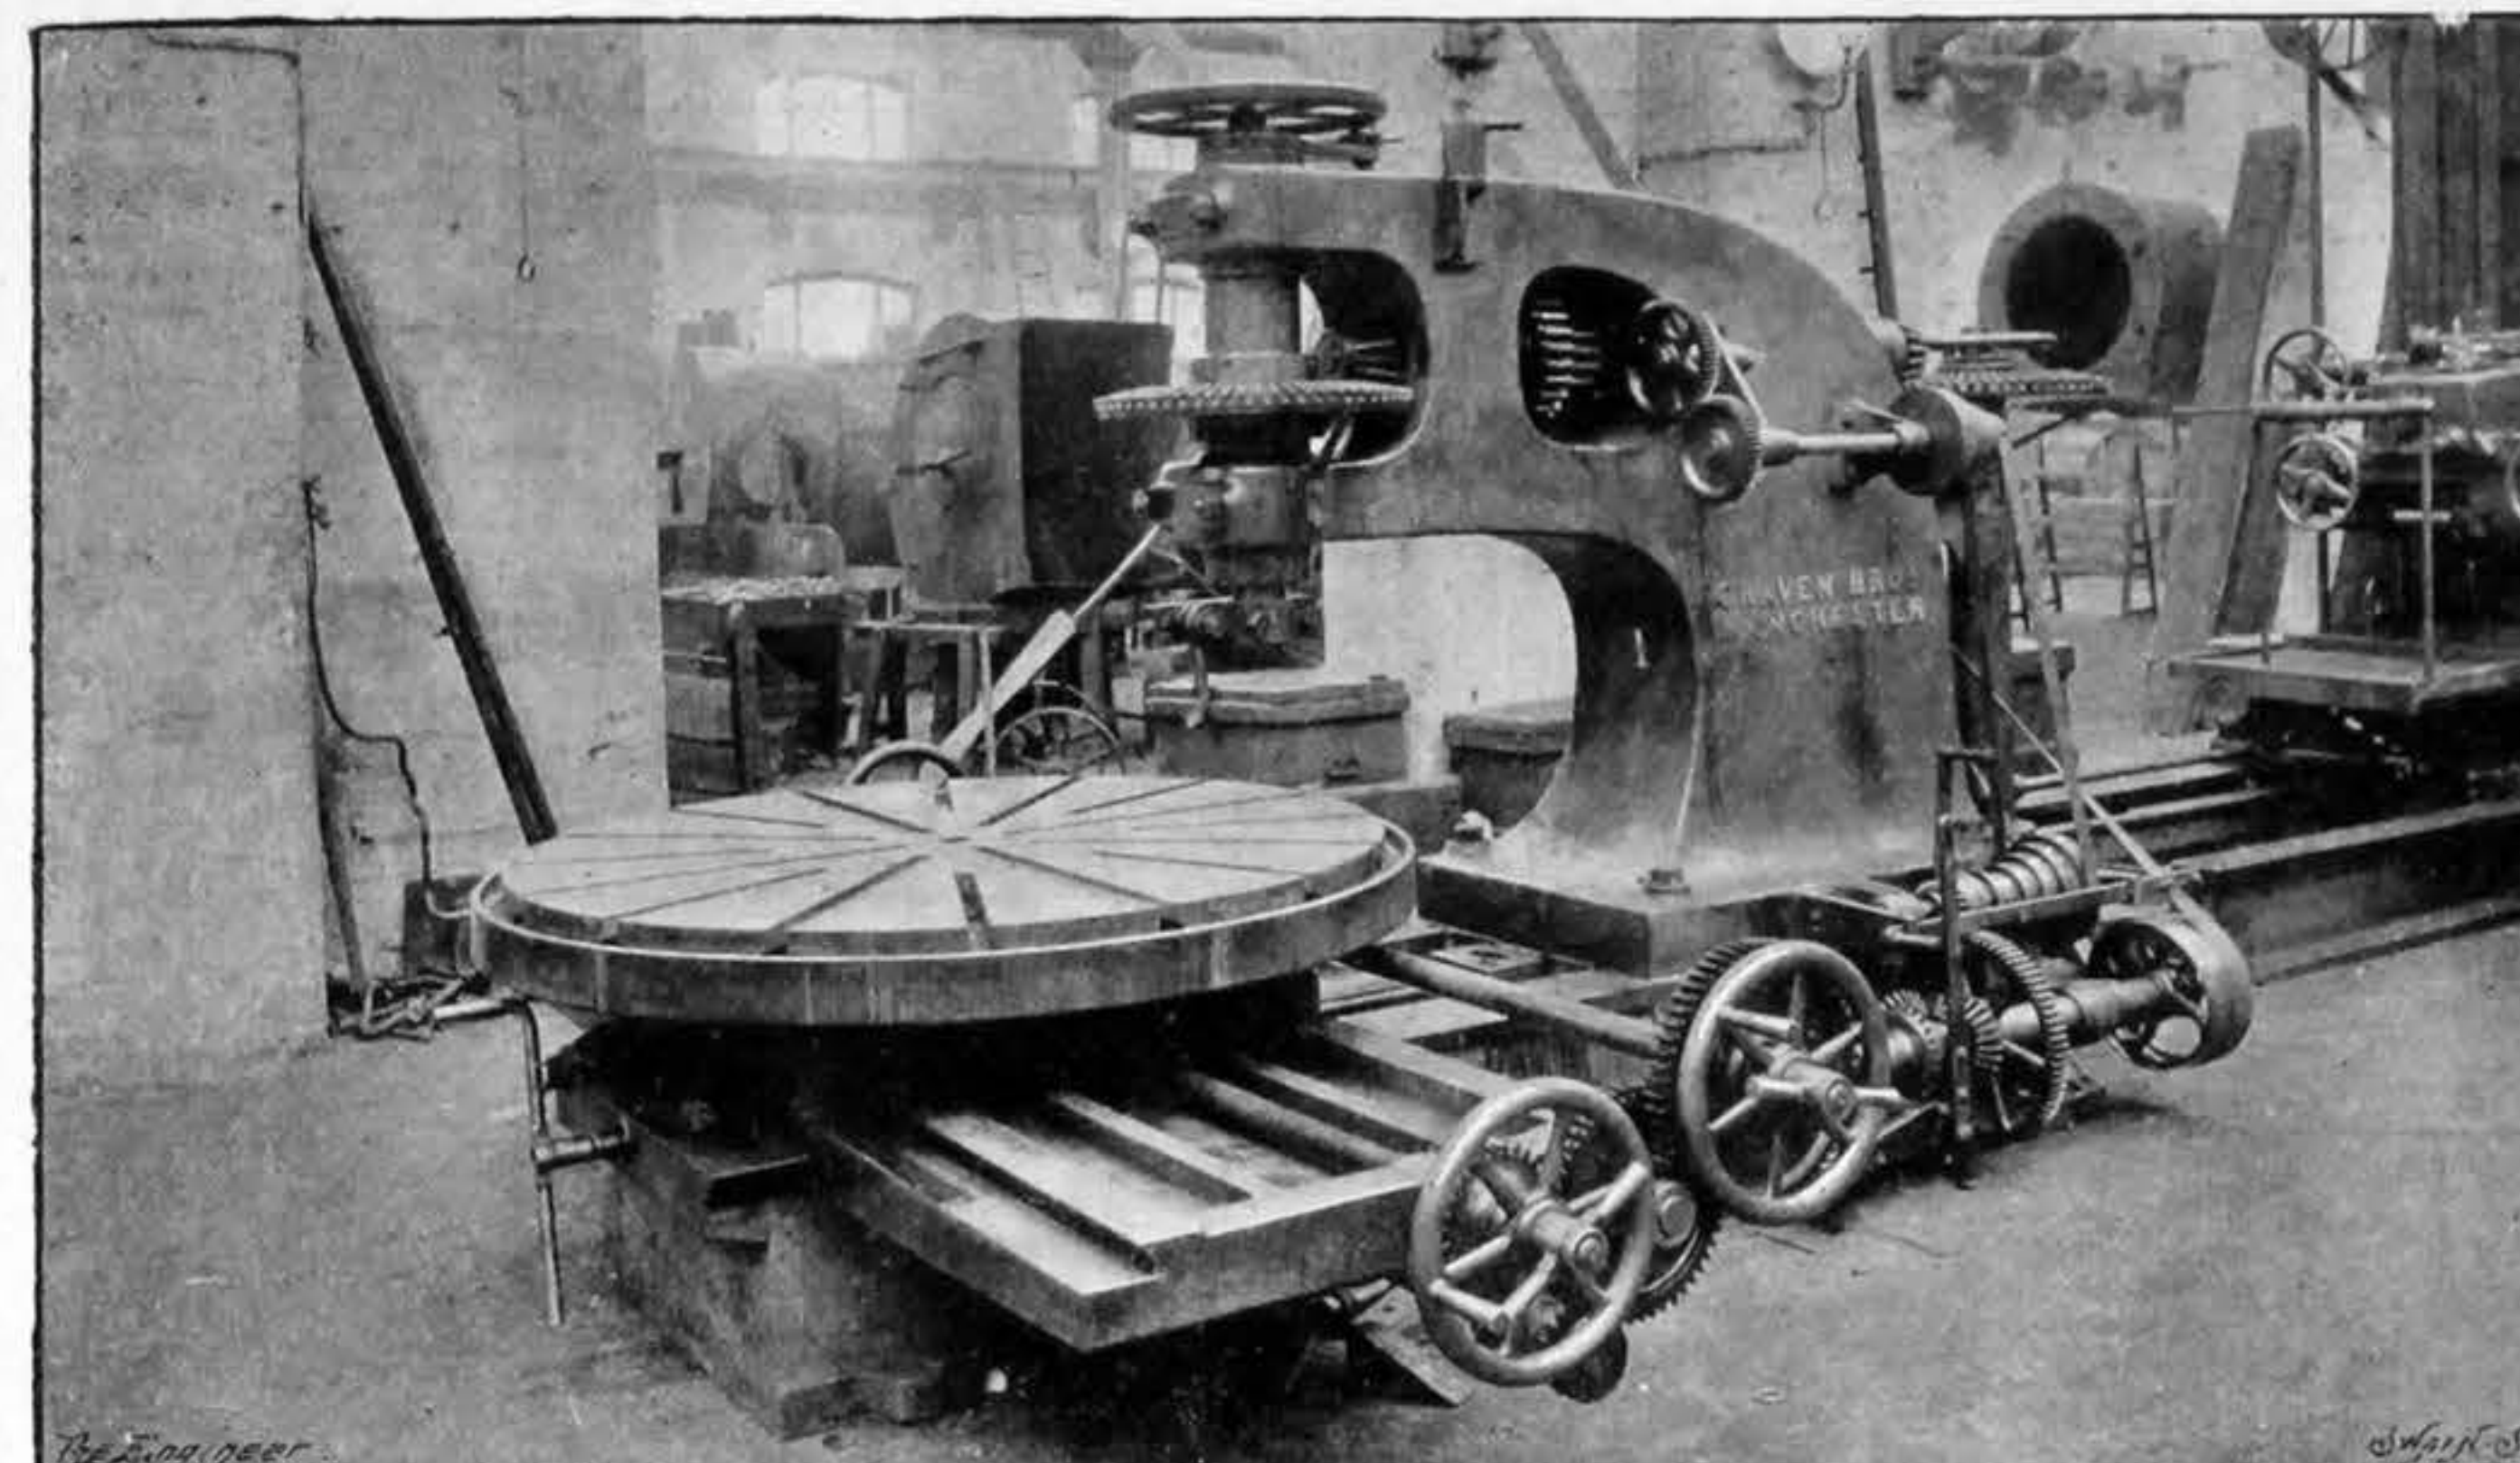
OVAL HOLE CUTTING AND MILLING MACHINE
